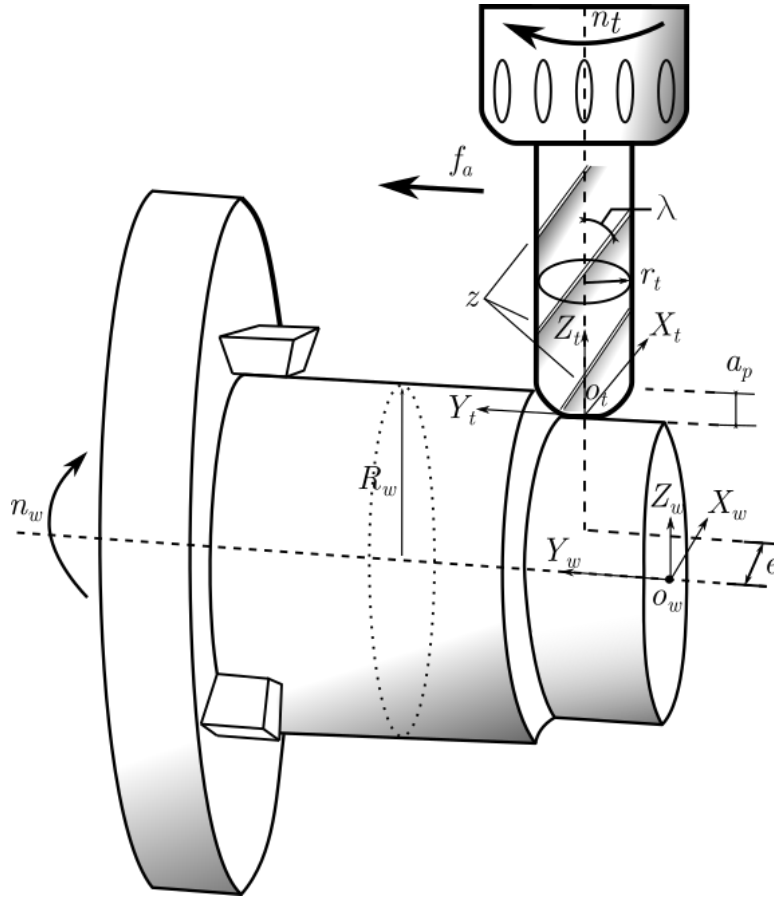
Orthogonal turn-milling kinematics. R_w Workpiece radius, n_w Workpiece rotational speed, r_t Tool radius, n_t Tool rotational speed, f_a Axial feed, a_p Depth of cut, z Number of cutting edges, e Eccentricity, λ Helix angle, O_t Tool origin, X_t Tool x direction, Y_t Tool y direction, Z_t Tool z direction, O_w Workpiece origin, X_w Workpiece x direction, Y_w Workpiece y direction, Z_w Workpiece z direction.
